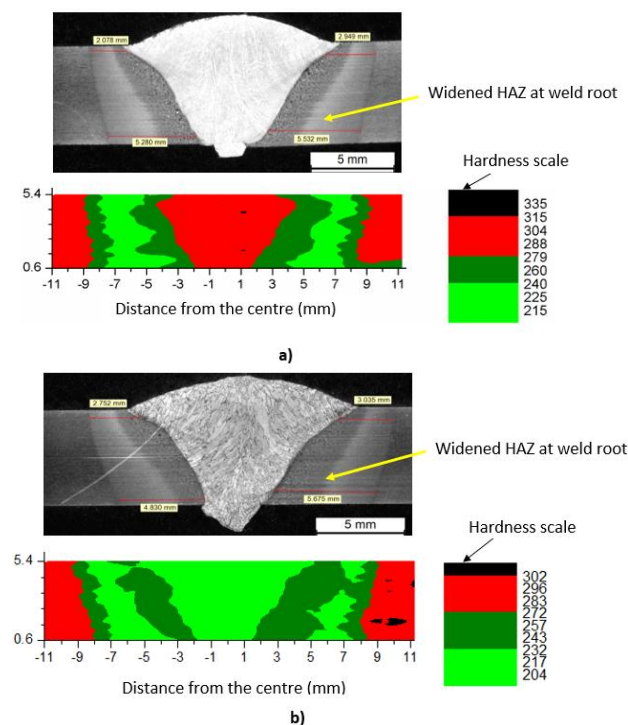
Hardness maps for, a) 120S welded specimen, b) 70S welded specimen
